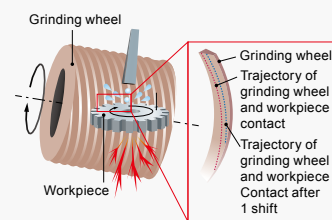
Trajectories of Contact between Grinding Wheel and Workpiece
